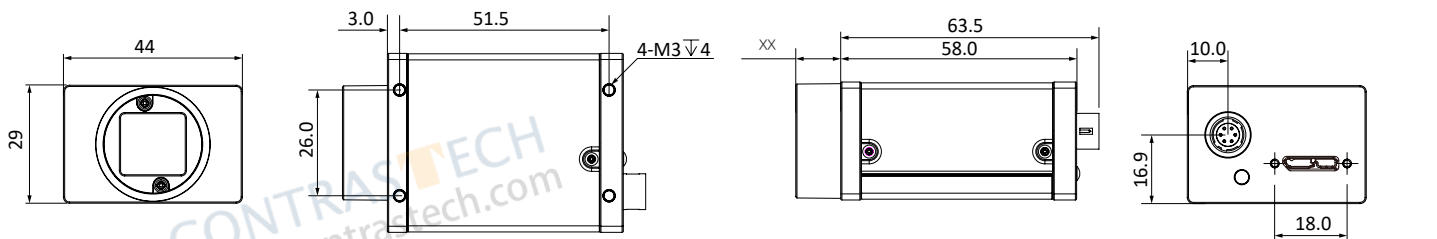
Mechanical Dimensions (in mm) for USB3.0 Cameras with 29 \* 44 \* 58mm flat housing.
